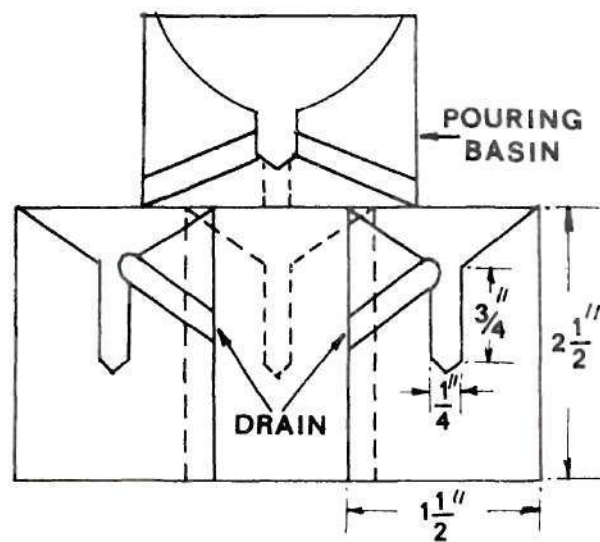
Assembly of Graphite Molds with Pouring Basin.
